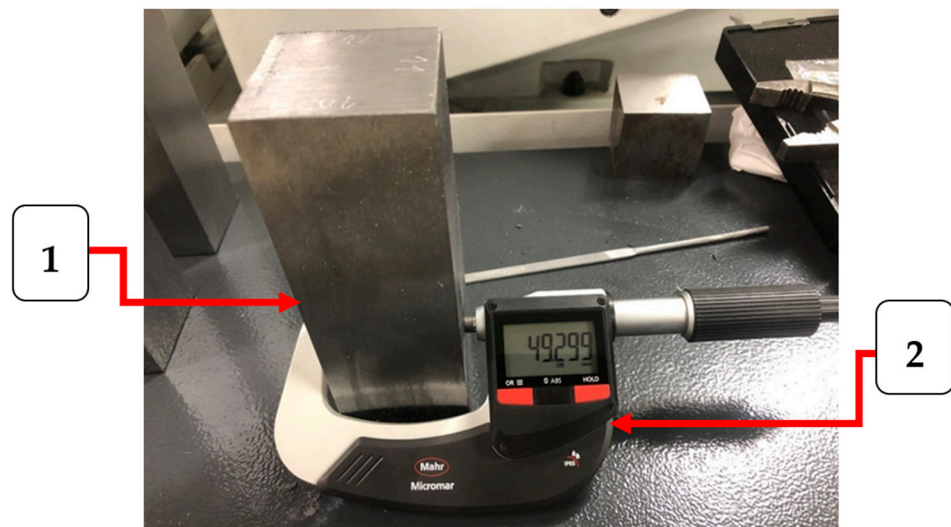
Measurement of the overall dimension of the ground workpiece: 1—measured workpiece and 2—digital micrometer.
